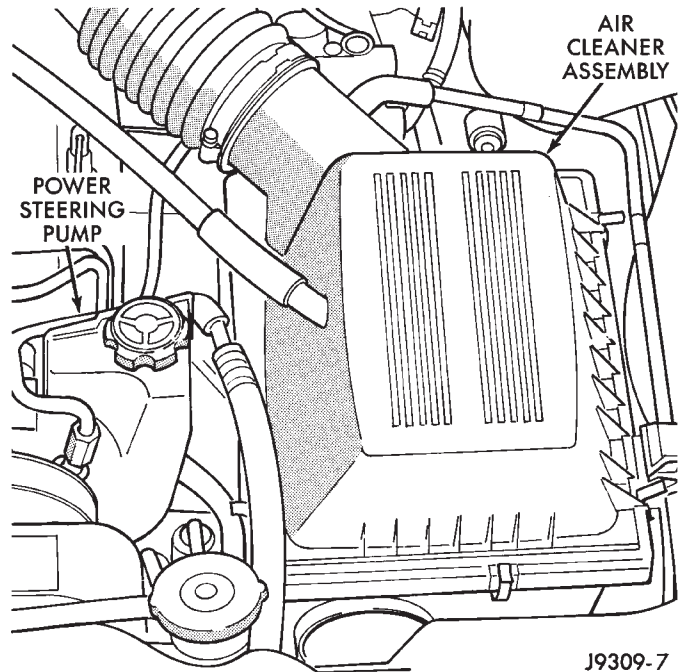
Air Cleaner Assembly & Power Steering Pump
